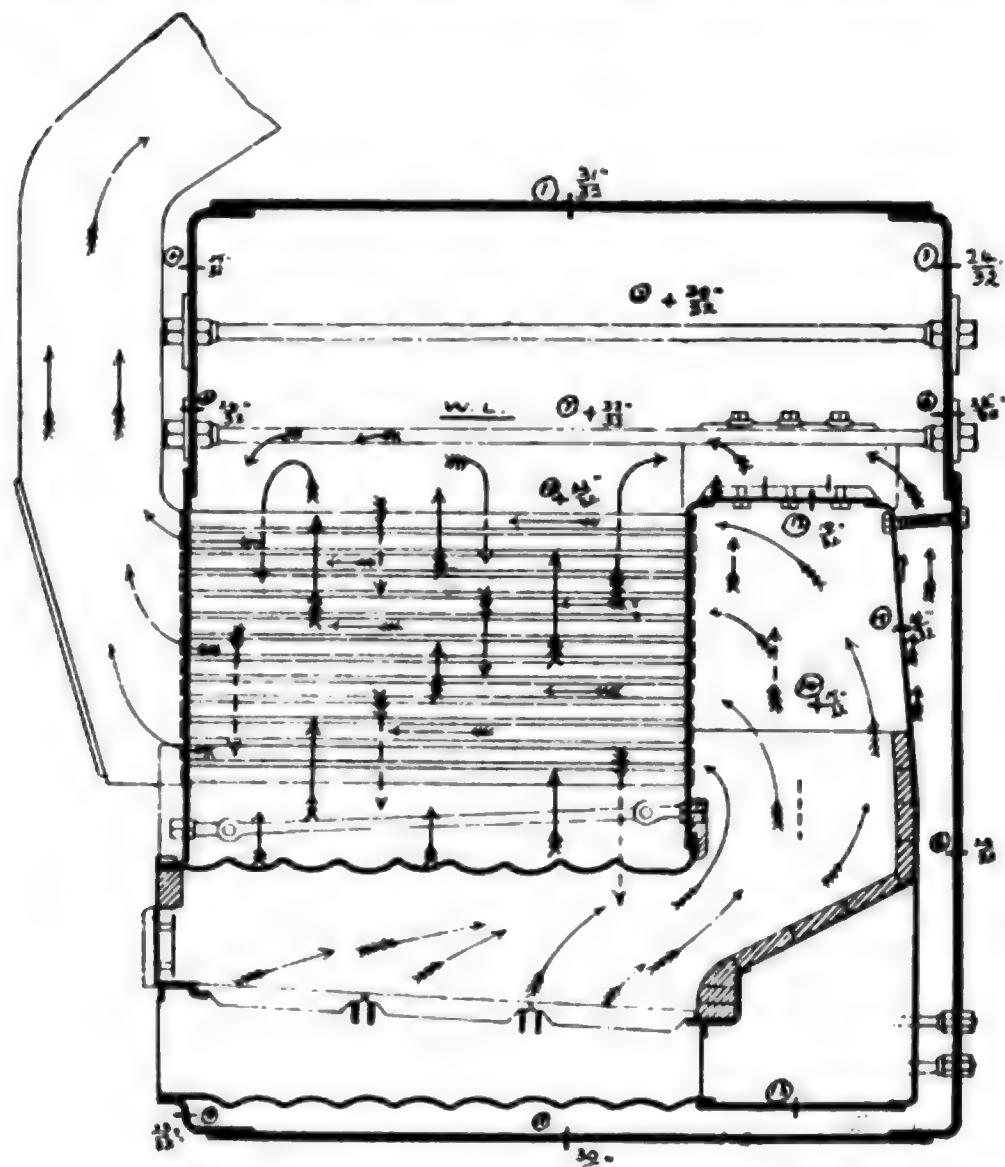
CYLINDRICAL RETURN TUBE BOILER.
